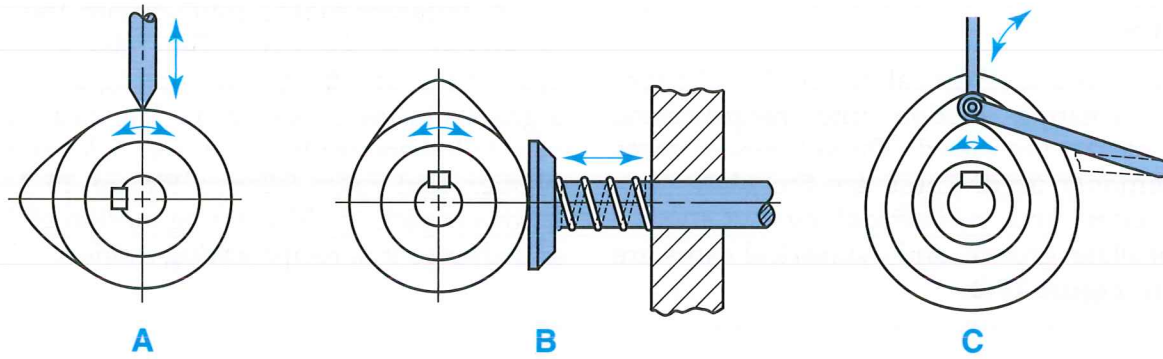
The three basic types of cam followers. A—Knife edge. B—Flat face. C—Roller.
